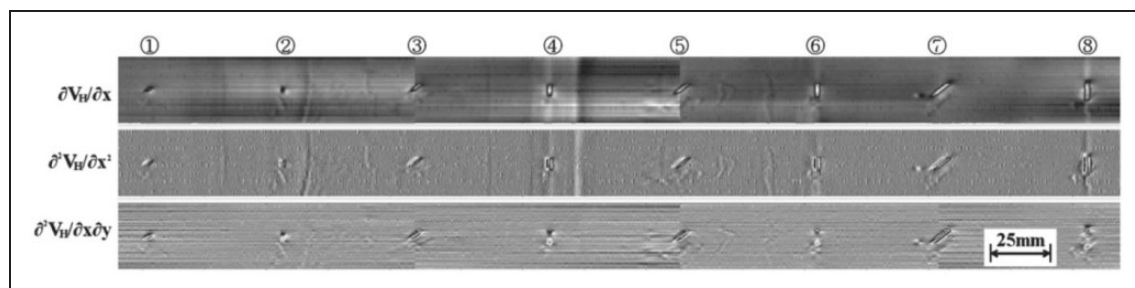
Eight surface cracks on a specimen of wheel and the results of the differential-type magnetic camera.²⁶
